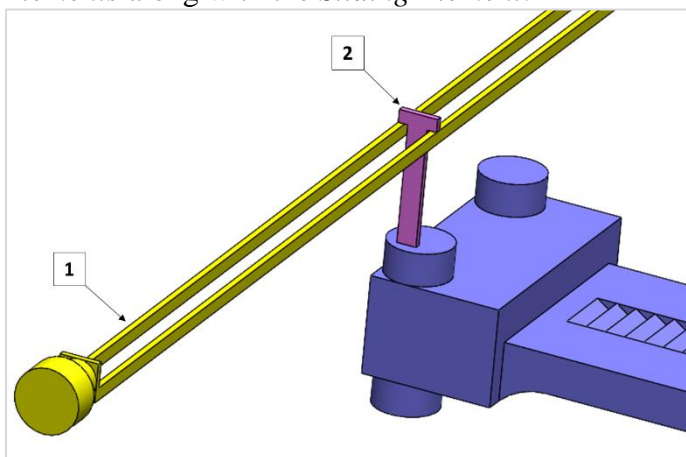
Demonstration of the Small Element and Sliding Element Assembly. 1- Sliding Element; 2- Small Element.
